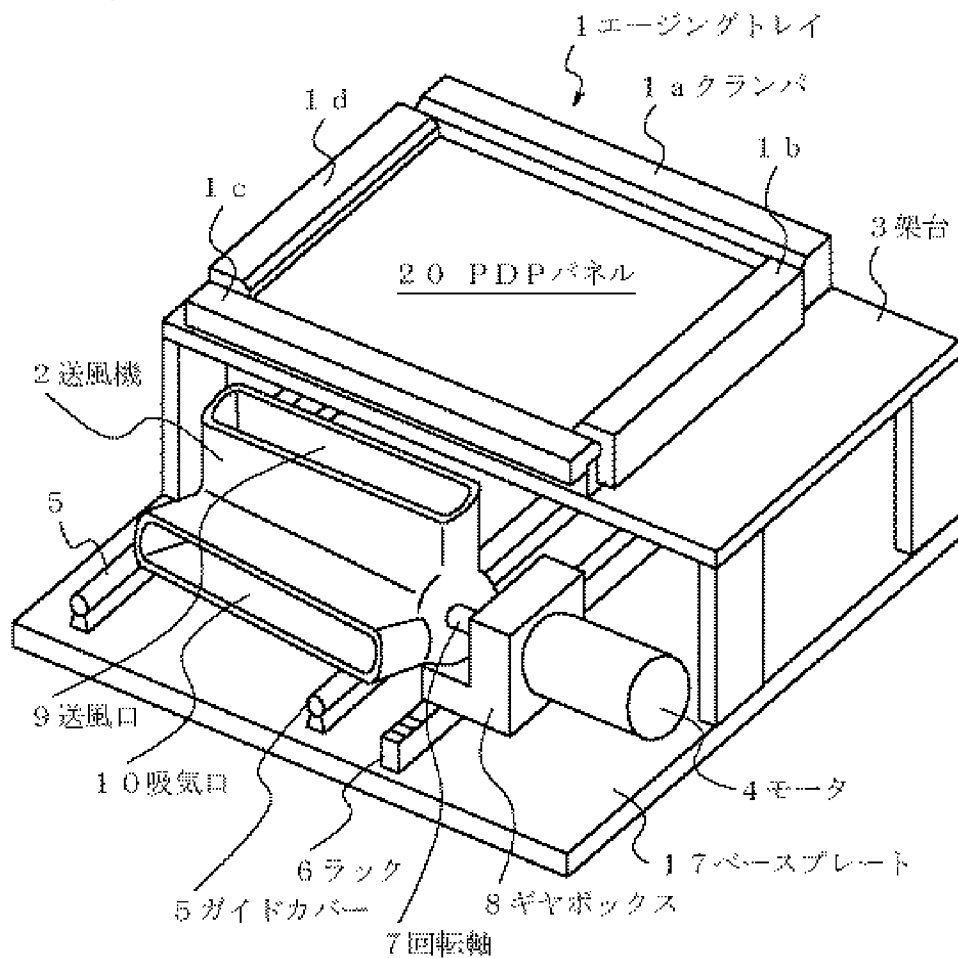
It is a figure showing the neighborhood of a gearbox of drawing 1.
